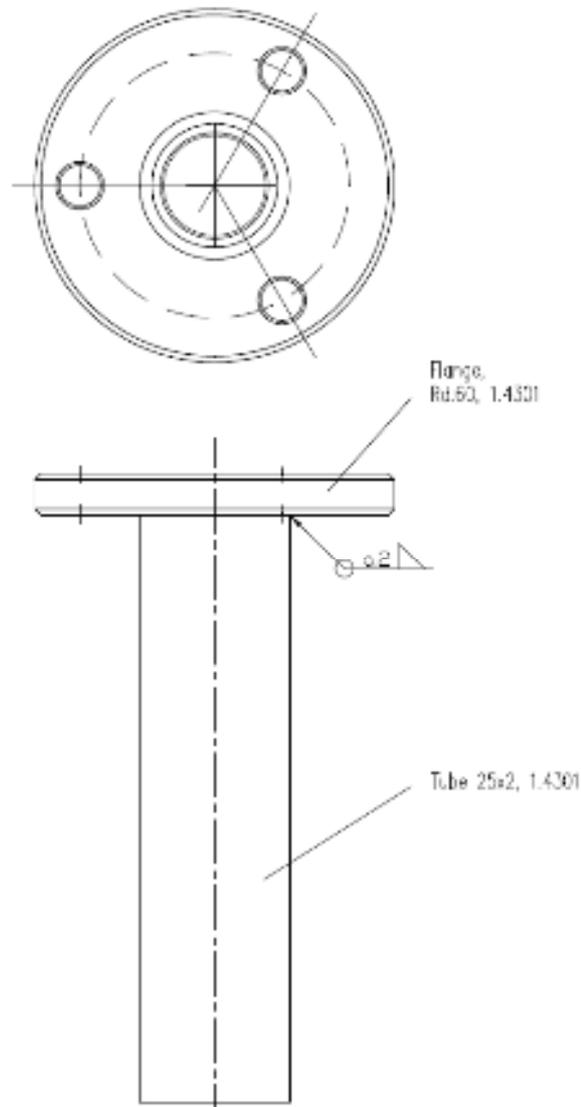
Immersion sleeve with screw-in thread for SS27 and MS27
